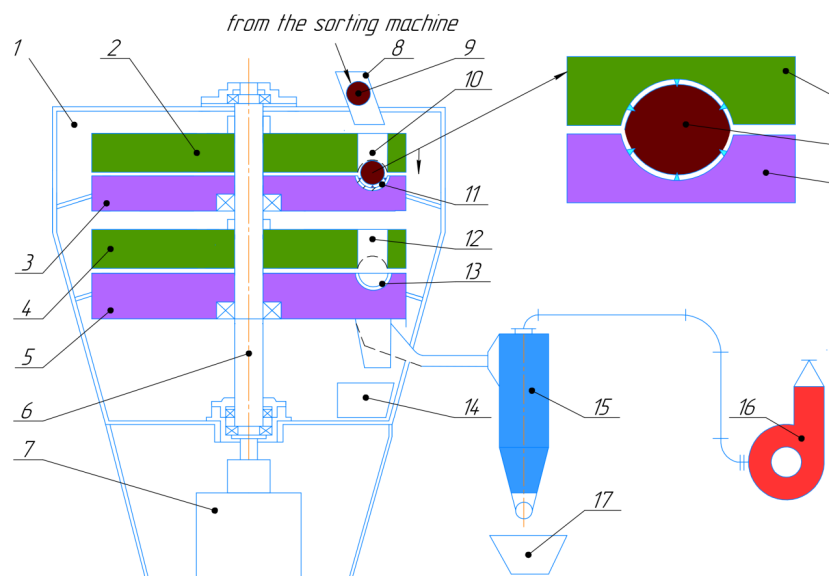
Experimental setup for shelling walnuts [21]: 1 – body; 2 – upper movable millstone of the first section; 3 – lower stationary millstone of the first section; 4 – upper movable millstone of the second section; 5 – lower stationary millstone of the second section; 6 – central shaft for driving the rotary and reciprocating motion of the movable millstones; 7 – servo drive providing rotary and reciprocating motion of the movable millstones; 8 – receiving pipe for sorted walnuts; 9 – sorted (calibrated) nut; 10 – through hole in the upper movable millstone; 11 – groove with a curved trajectory; 12 – through hole in the movable millstone of the second section; 13 – groove with a curved trajectory; 14 – hopper for collecting the peeled kernel; 15 – cyclone for separating shells from the air flow; 16 – suction fan; 17 – walnut shell collection bin
